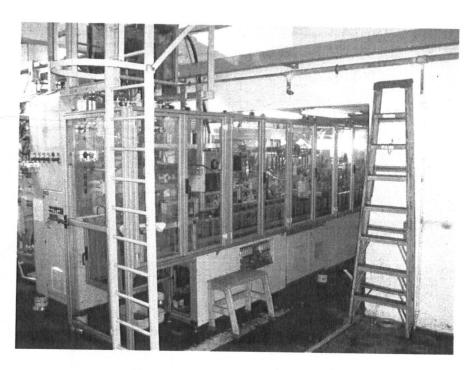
Facing west; view of the northern coffee roaster on 4th floor of Building 6.
